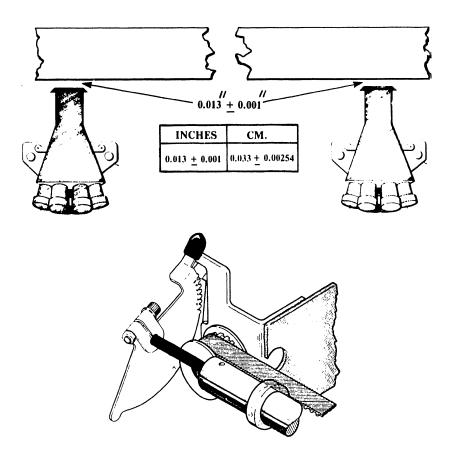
HELD ADJUSTMENT ARM ASSEMBLY
